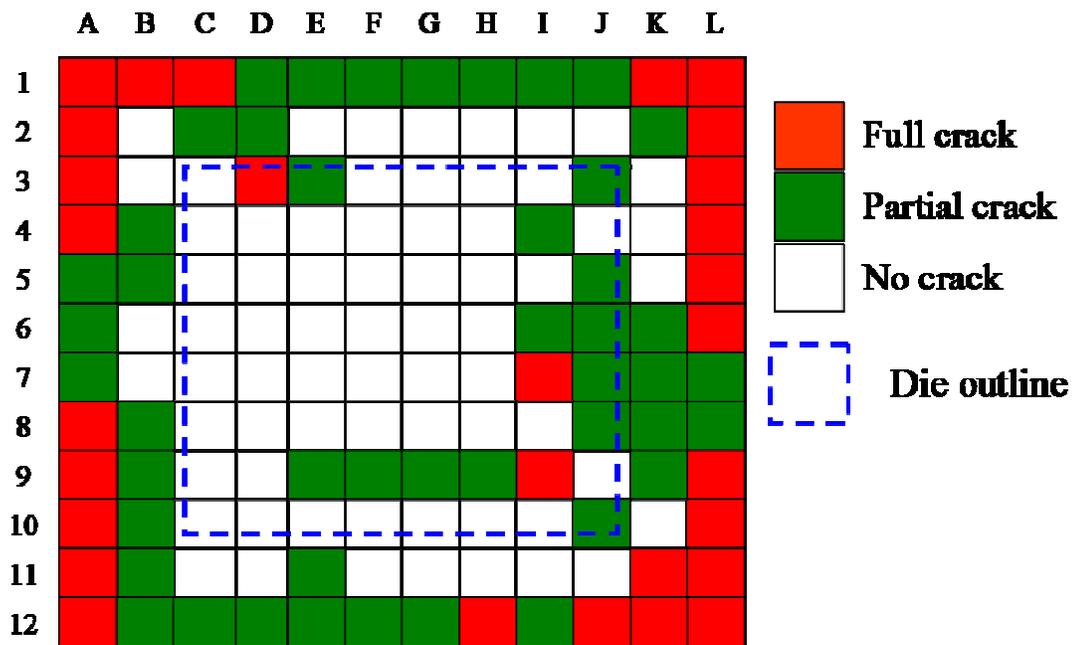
Dye and pry results of Sn based finish Sn3.5Ag solder board – Package E (144 I/O BGA)
